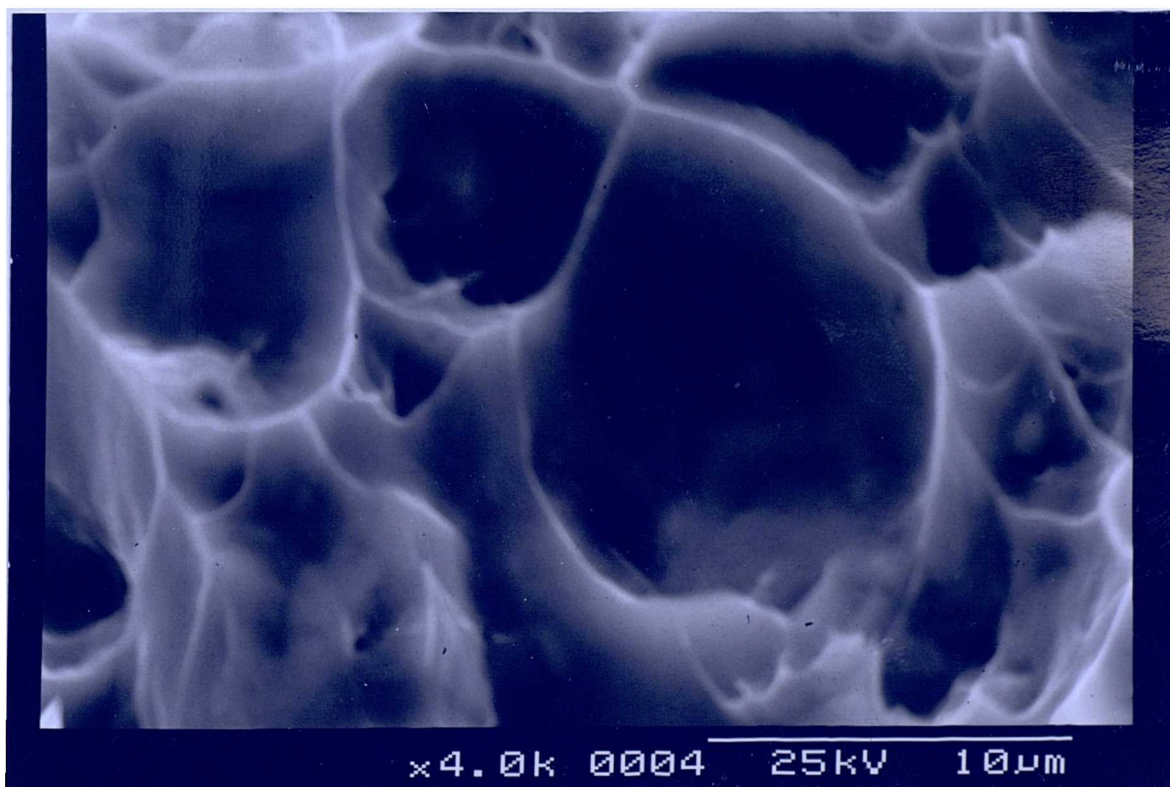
Fracture Surface Of Weak Weld (α : 0.92 mm, f = 100 Hz, P_{fr} : 50.5 MPa - experiment D16)
